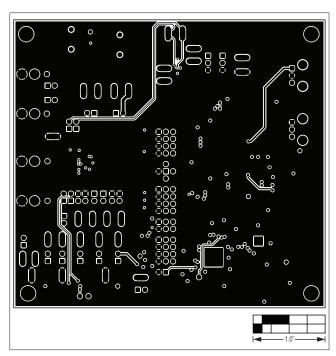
MAX9880A EV Kit PCB Layout—Solder Side
